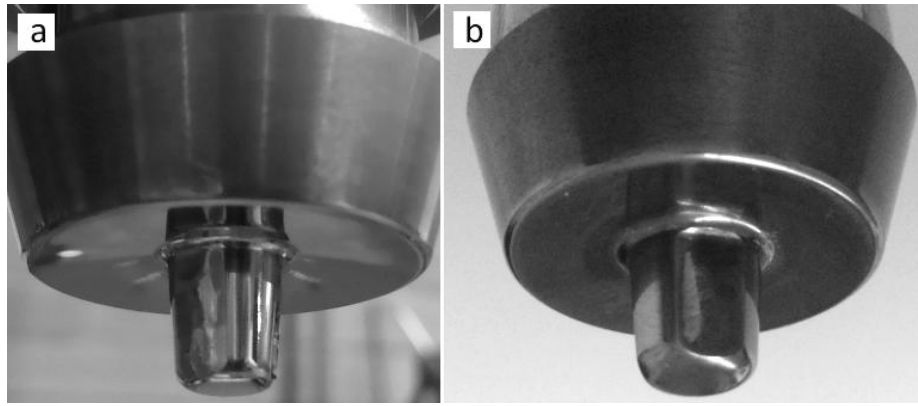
FSW tool used in this study: (a) before and (b) after conducting all the welds. No wear is appreciated after the welds were made.
